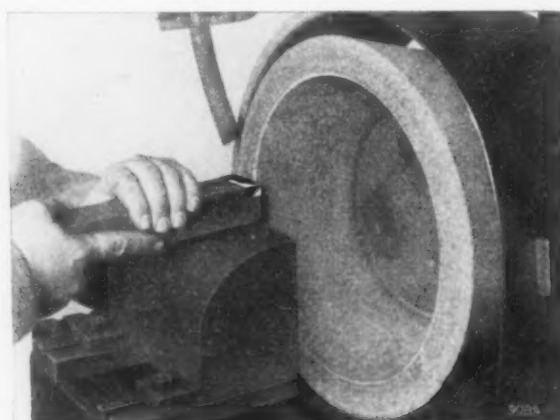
Free-hand finishing of the tungsten-carbide tool on a cup wheel.
